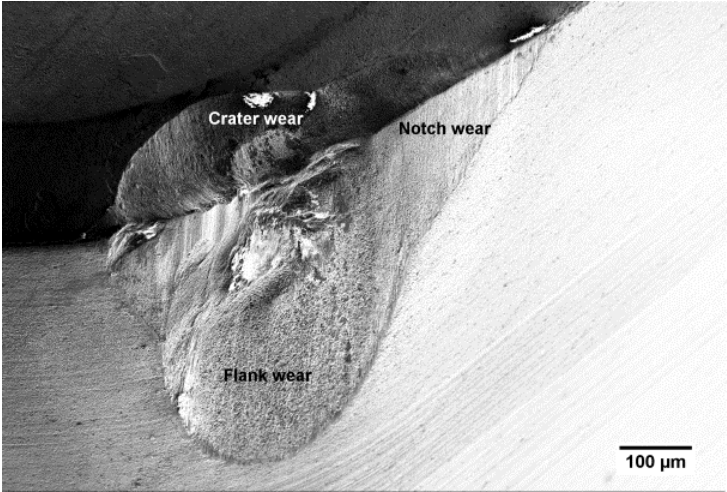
Crater wear, flank wear and notch wear of a cutting tool.
